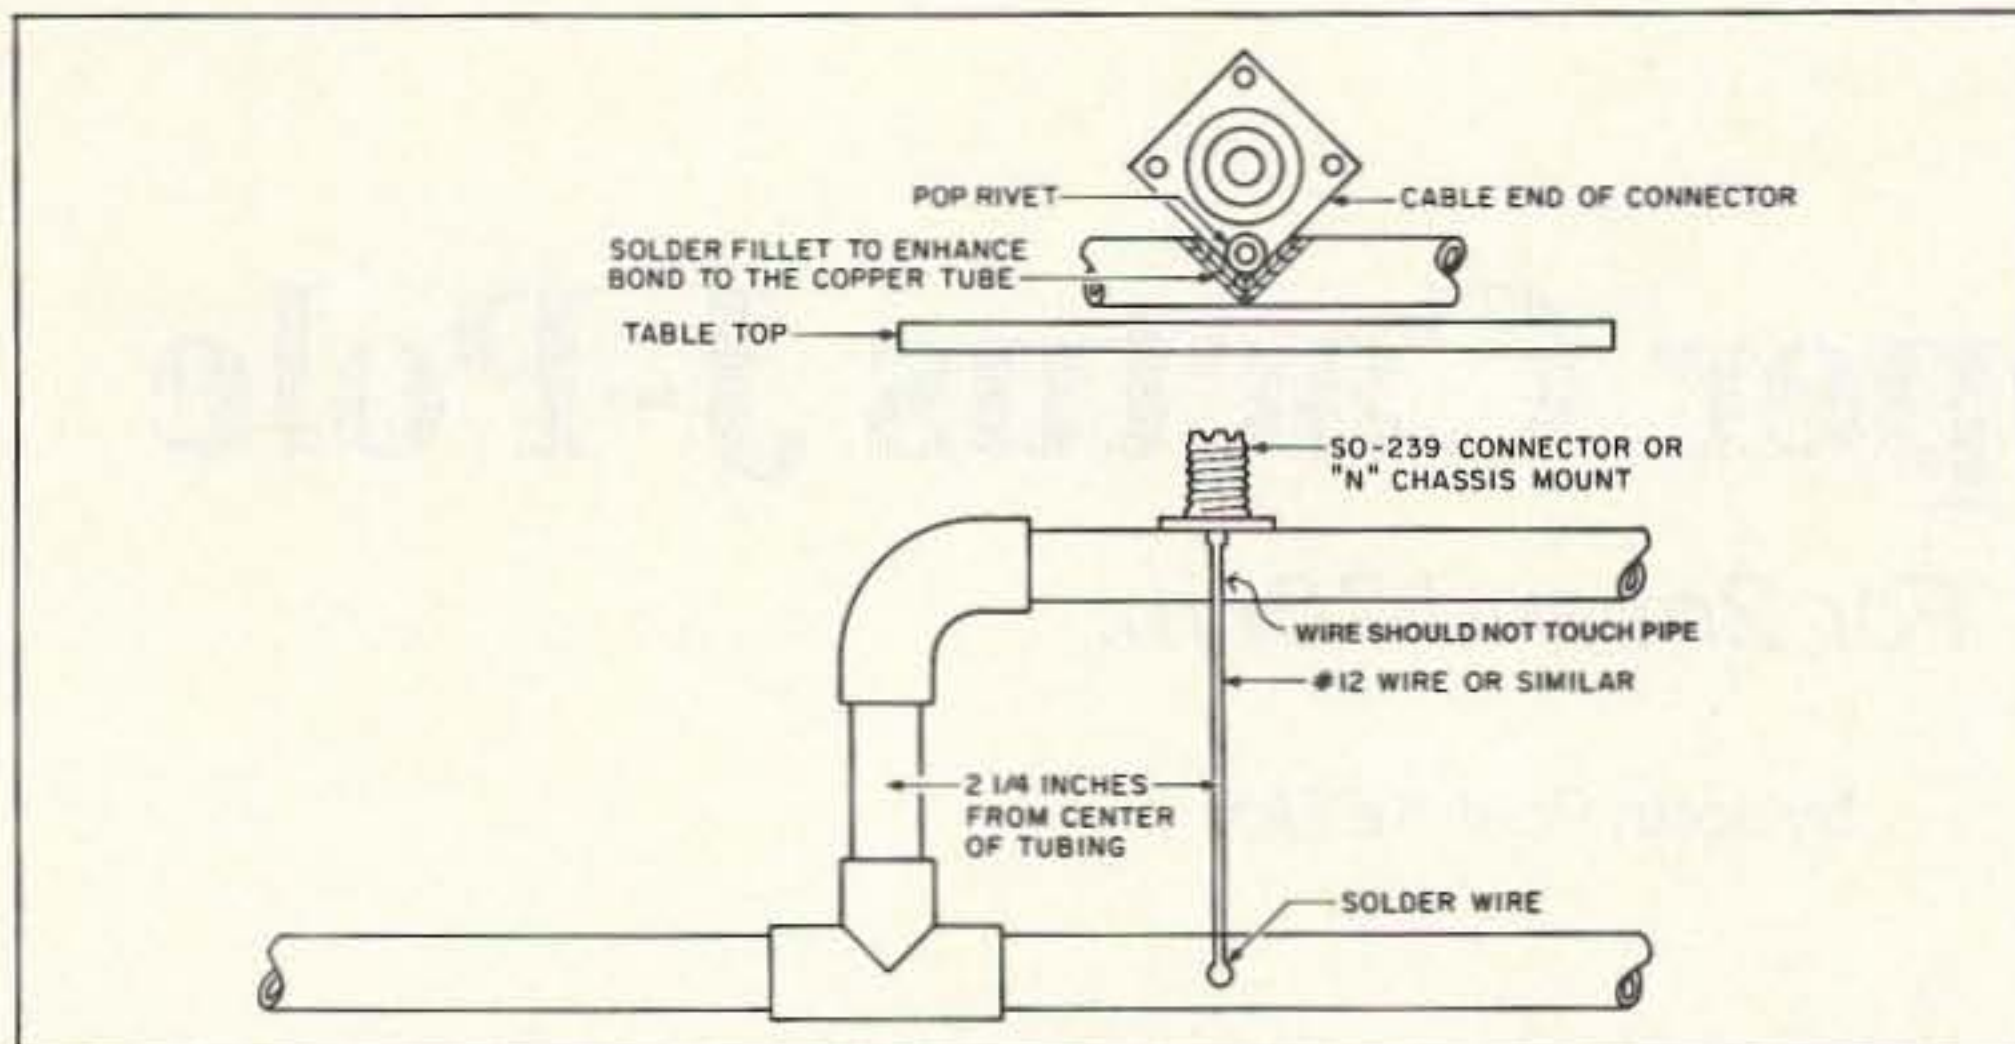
See the materials list. Before soldering, clean the joints and place the assembled antenna on a flat, nonflammable surface. Practice on some scraps of tubing and extra pipe joints if you're new to this. All dimensions are center-to-center.
